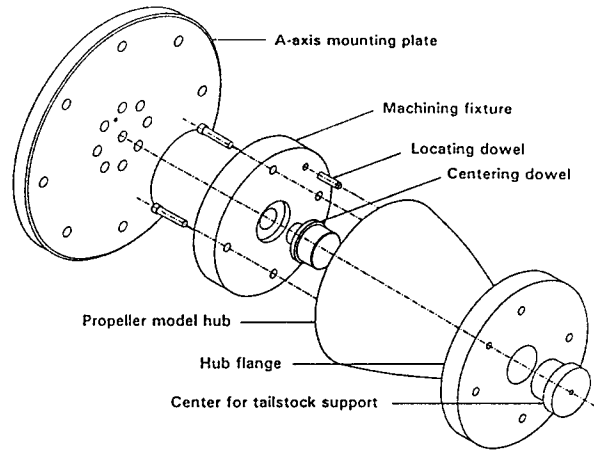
MACHINING FIXTURE FOR PROPELLER MODEL
